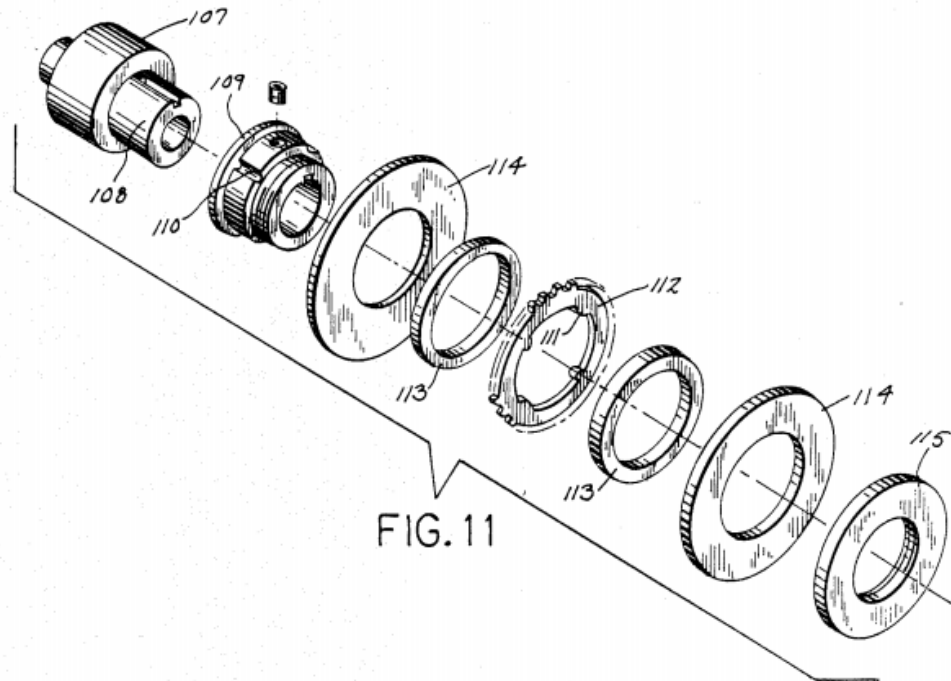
is an exploded view in perspective of the sprocket and one-way clutch assembly of the drive shaft of the second embodiment. *Id.* at 3:20–22.
